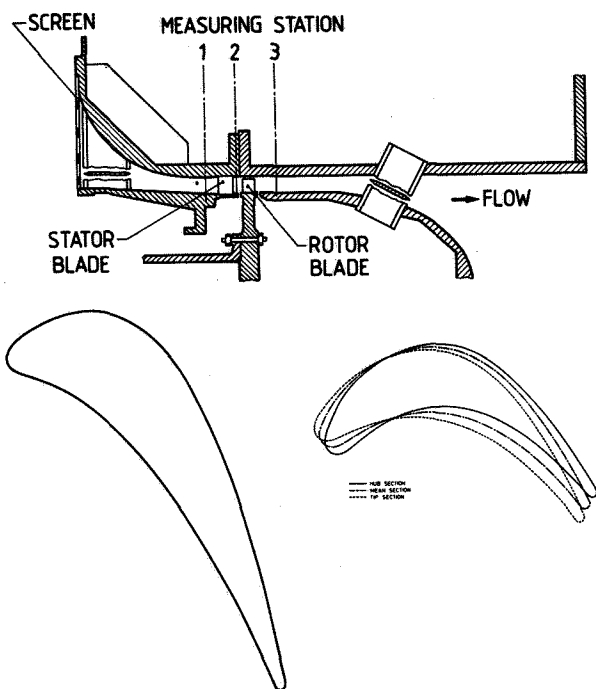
Single stage axial turbine : meridional and blade-to-blade geometry
